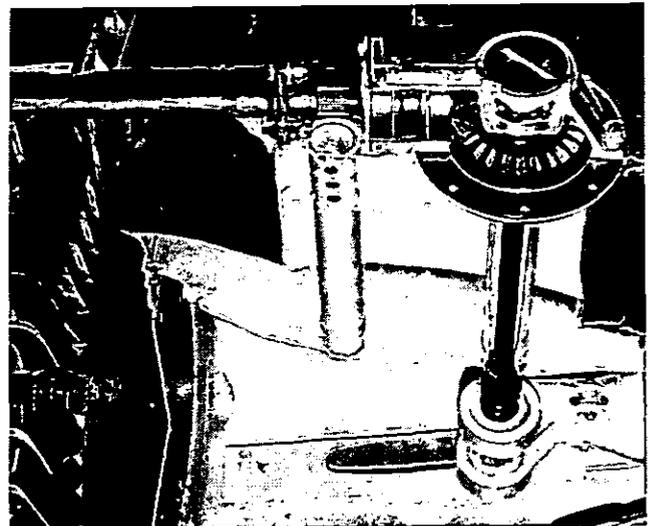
Bullet operating gear. The rack can be seen at the right and was driven by a shaft entering through a strut. This was controlled by the gear type servomotor (located above the compressor section) and driven by a long torque tube to the gears on the exhaust housing shown. Maximum travel of the "bullet" was 18.73 cm.
